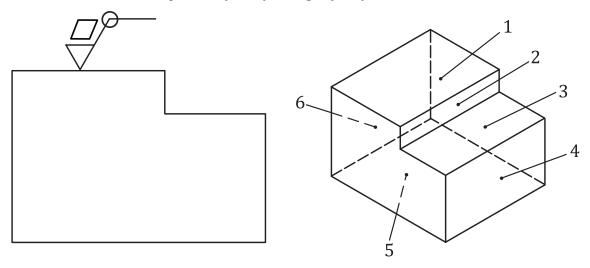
Areal surface requirement for all six surfaces represented by outline on workpiece
